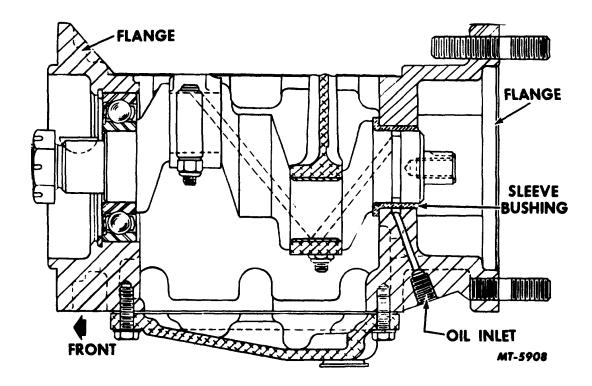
Crankcase of Flange-Type Air Compressor (Short Version)
